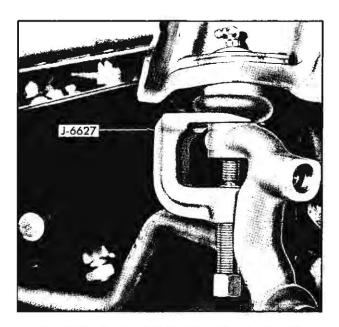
Pressing Ball Stud from Steering Knuckle
